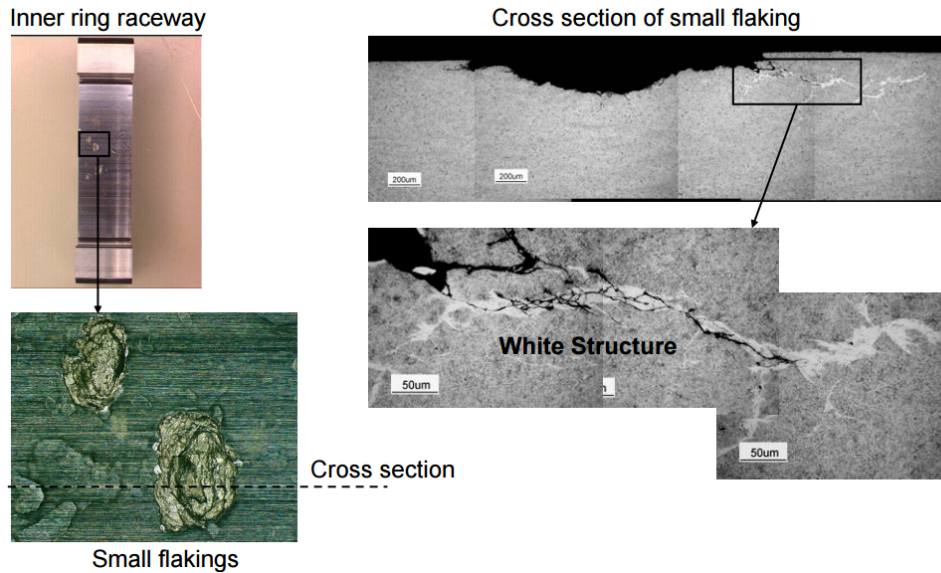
WSF in an inner ring raceway of a high-speed shaft bearing assembled in a wind turbine gearbox. a) Typical spalling produced by WSF, b) Cross section of the ring raceway taken along the dashed line showed in a). The section shows WEAs and a complex crack network extending to the contact surface. Adapted from [50].
